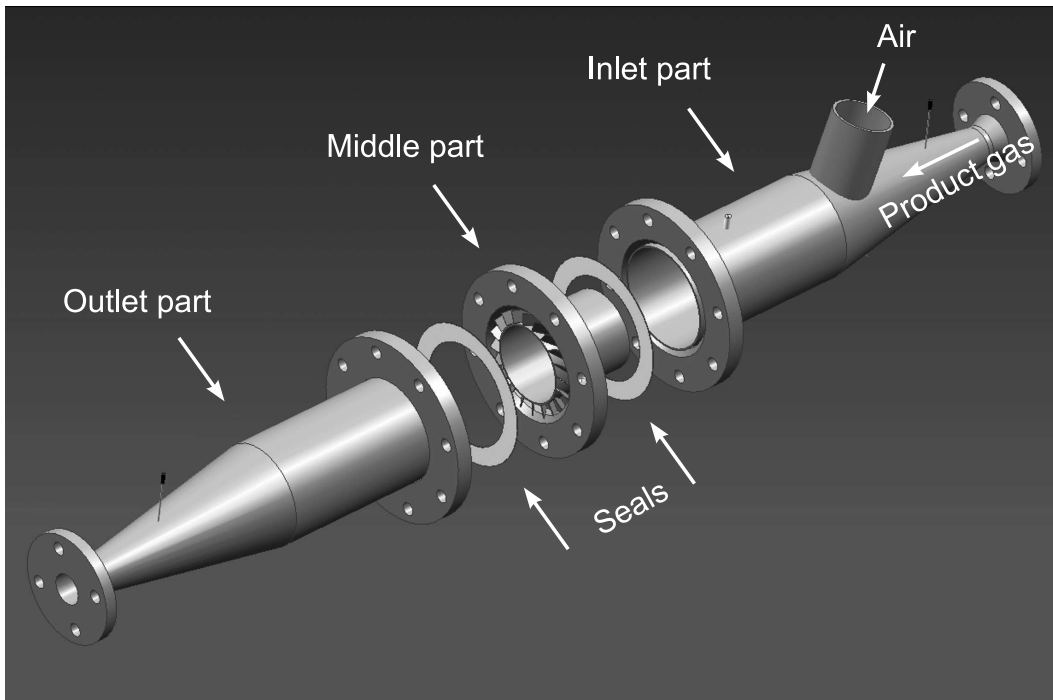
Explosion of up-scaled partial combustion burner.
